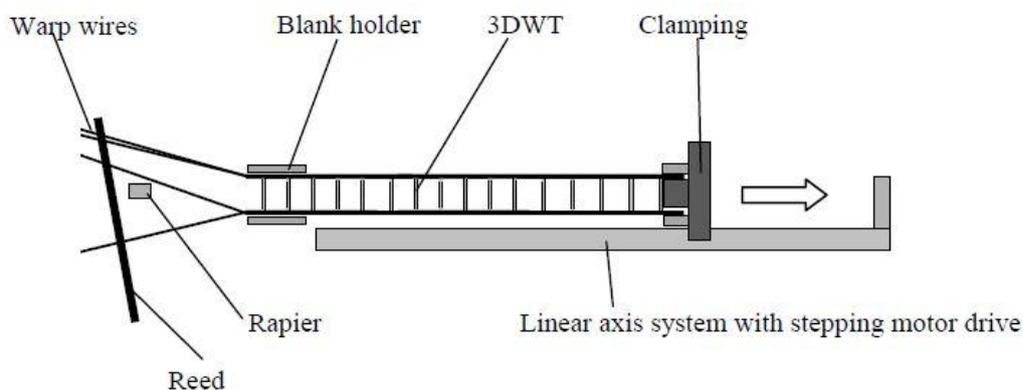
schematic picture of the linear pull of device with stepping motor drive [TUD ITM]
